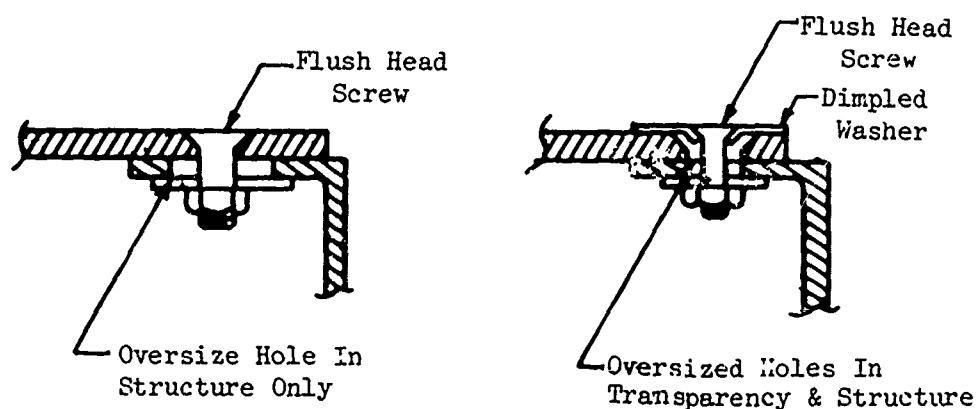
Oversized Hole Installations for Flush Fasteners.
